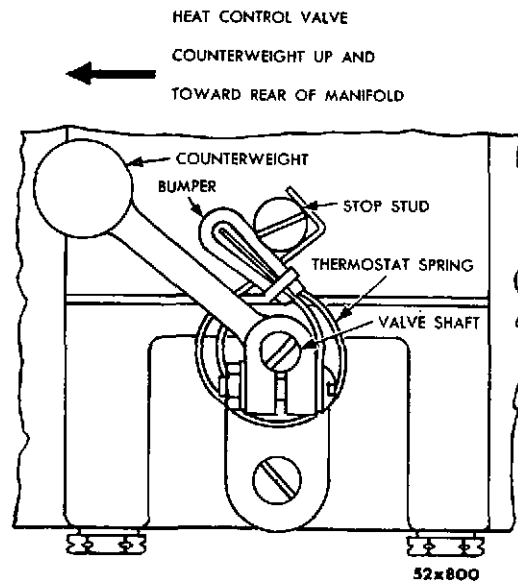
Position of Universal Manifold Heat control Valve Counterweight for downdraft Intake and Front Exhaust and Updraft Intake and Rear Exhaust
